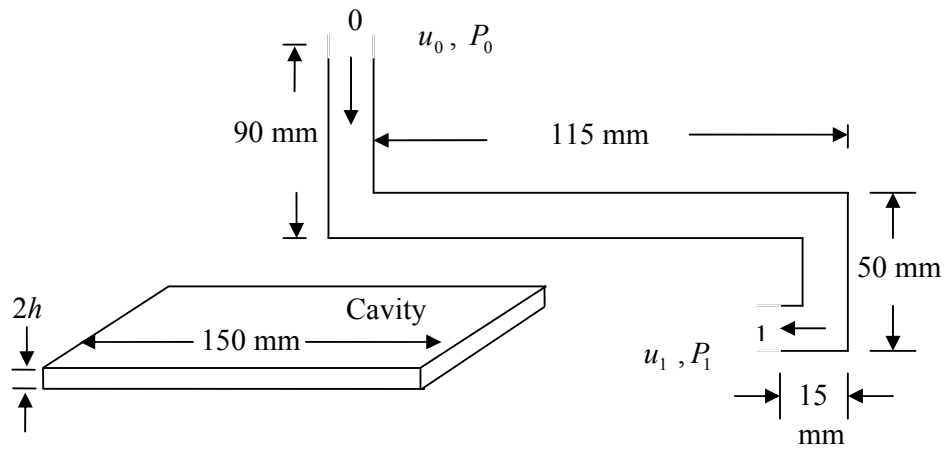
Dimensions of sprue, runner, and mold cavity in the mold used to predict injection filling and cooling times.
